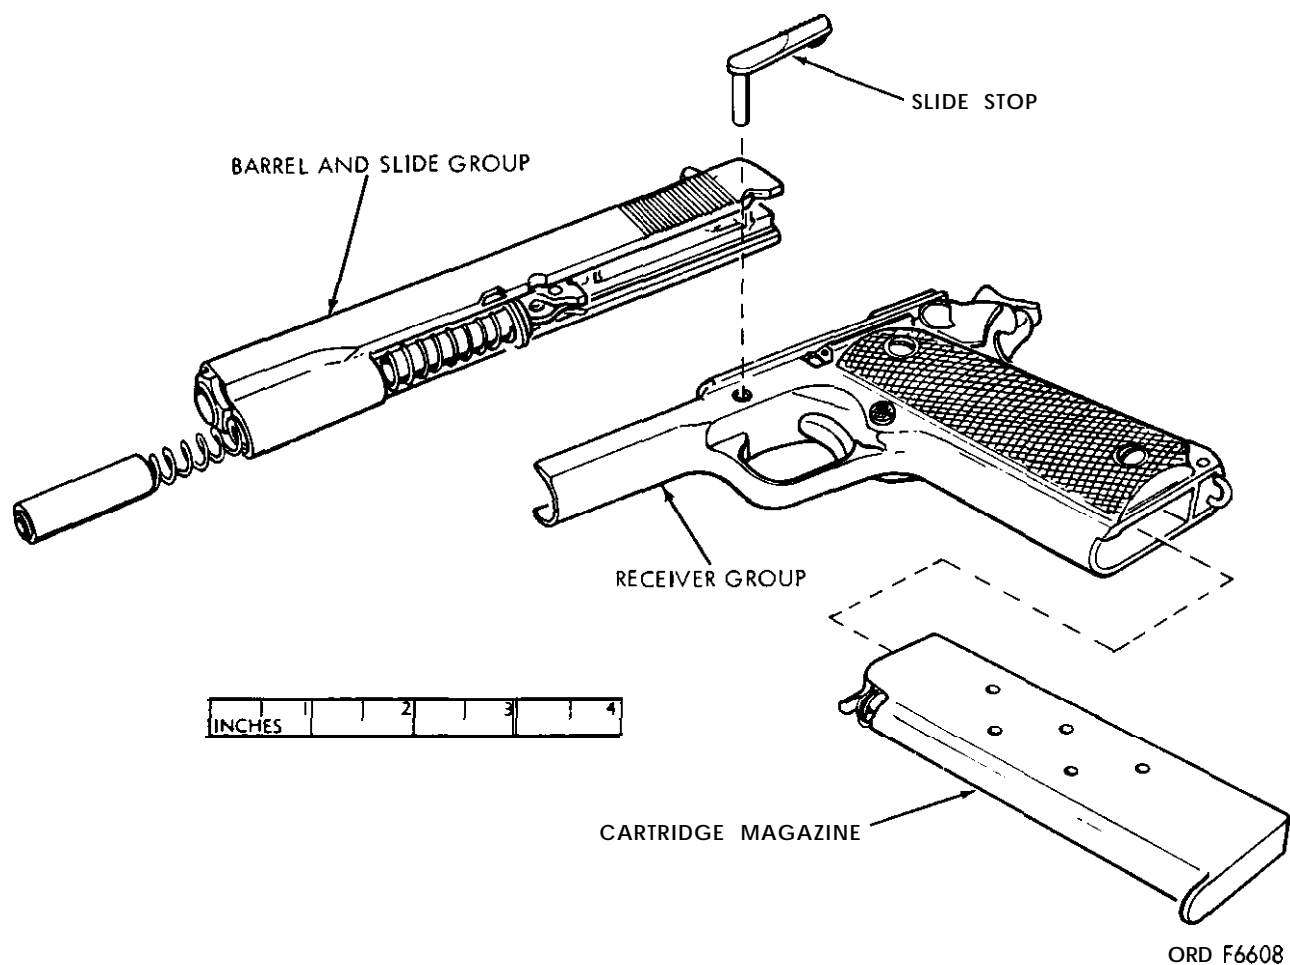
Caliber .45 automatic pistol M1911A1- exploded view.
